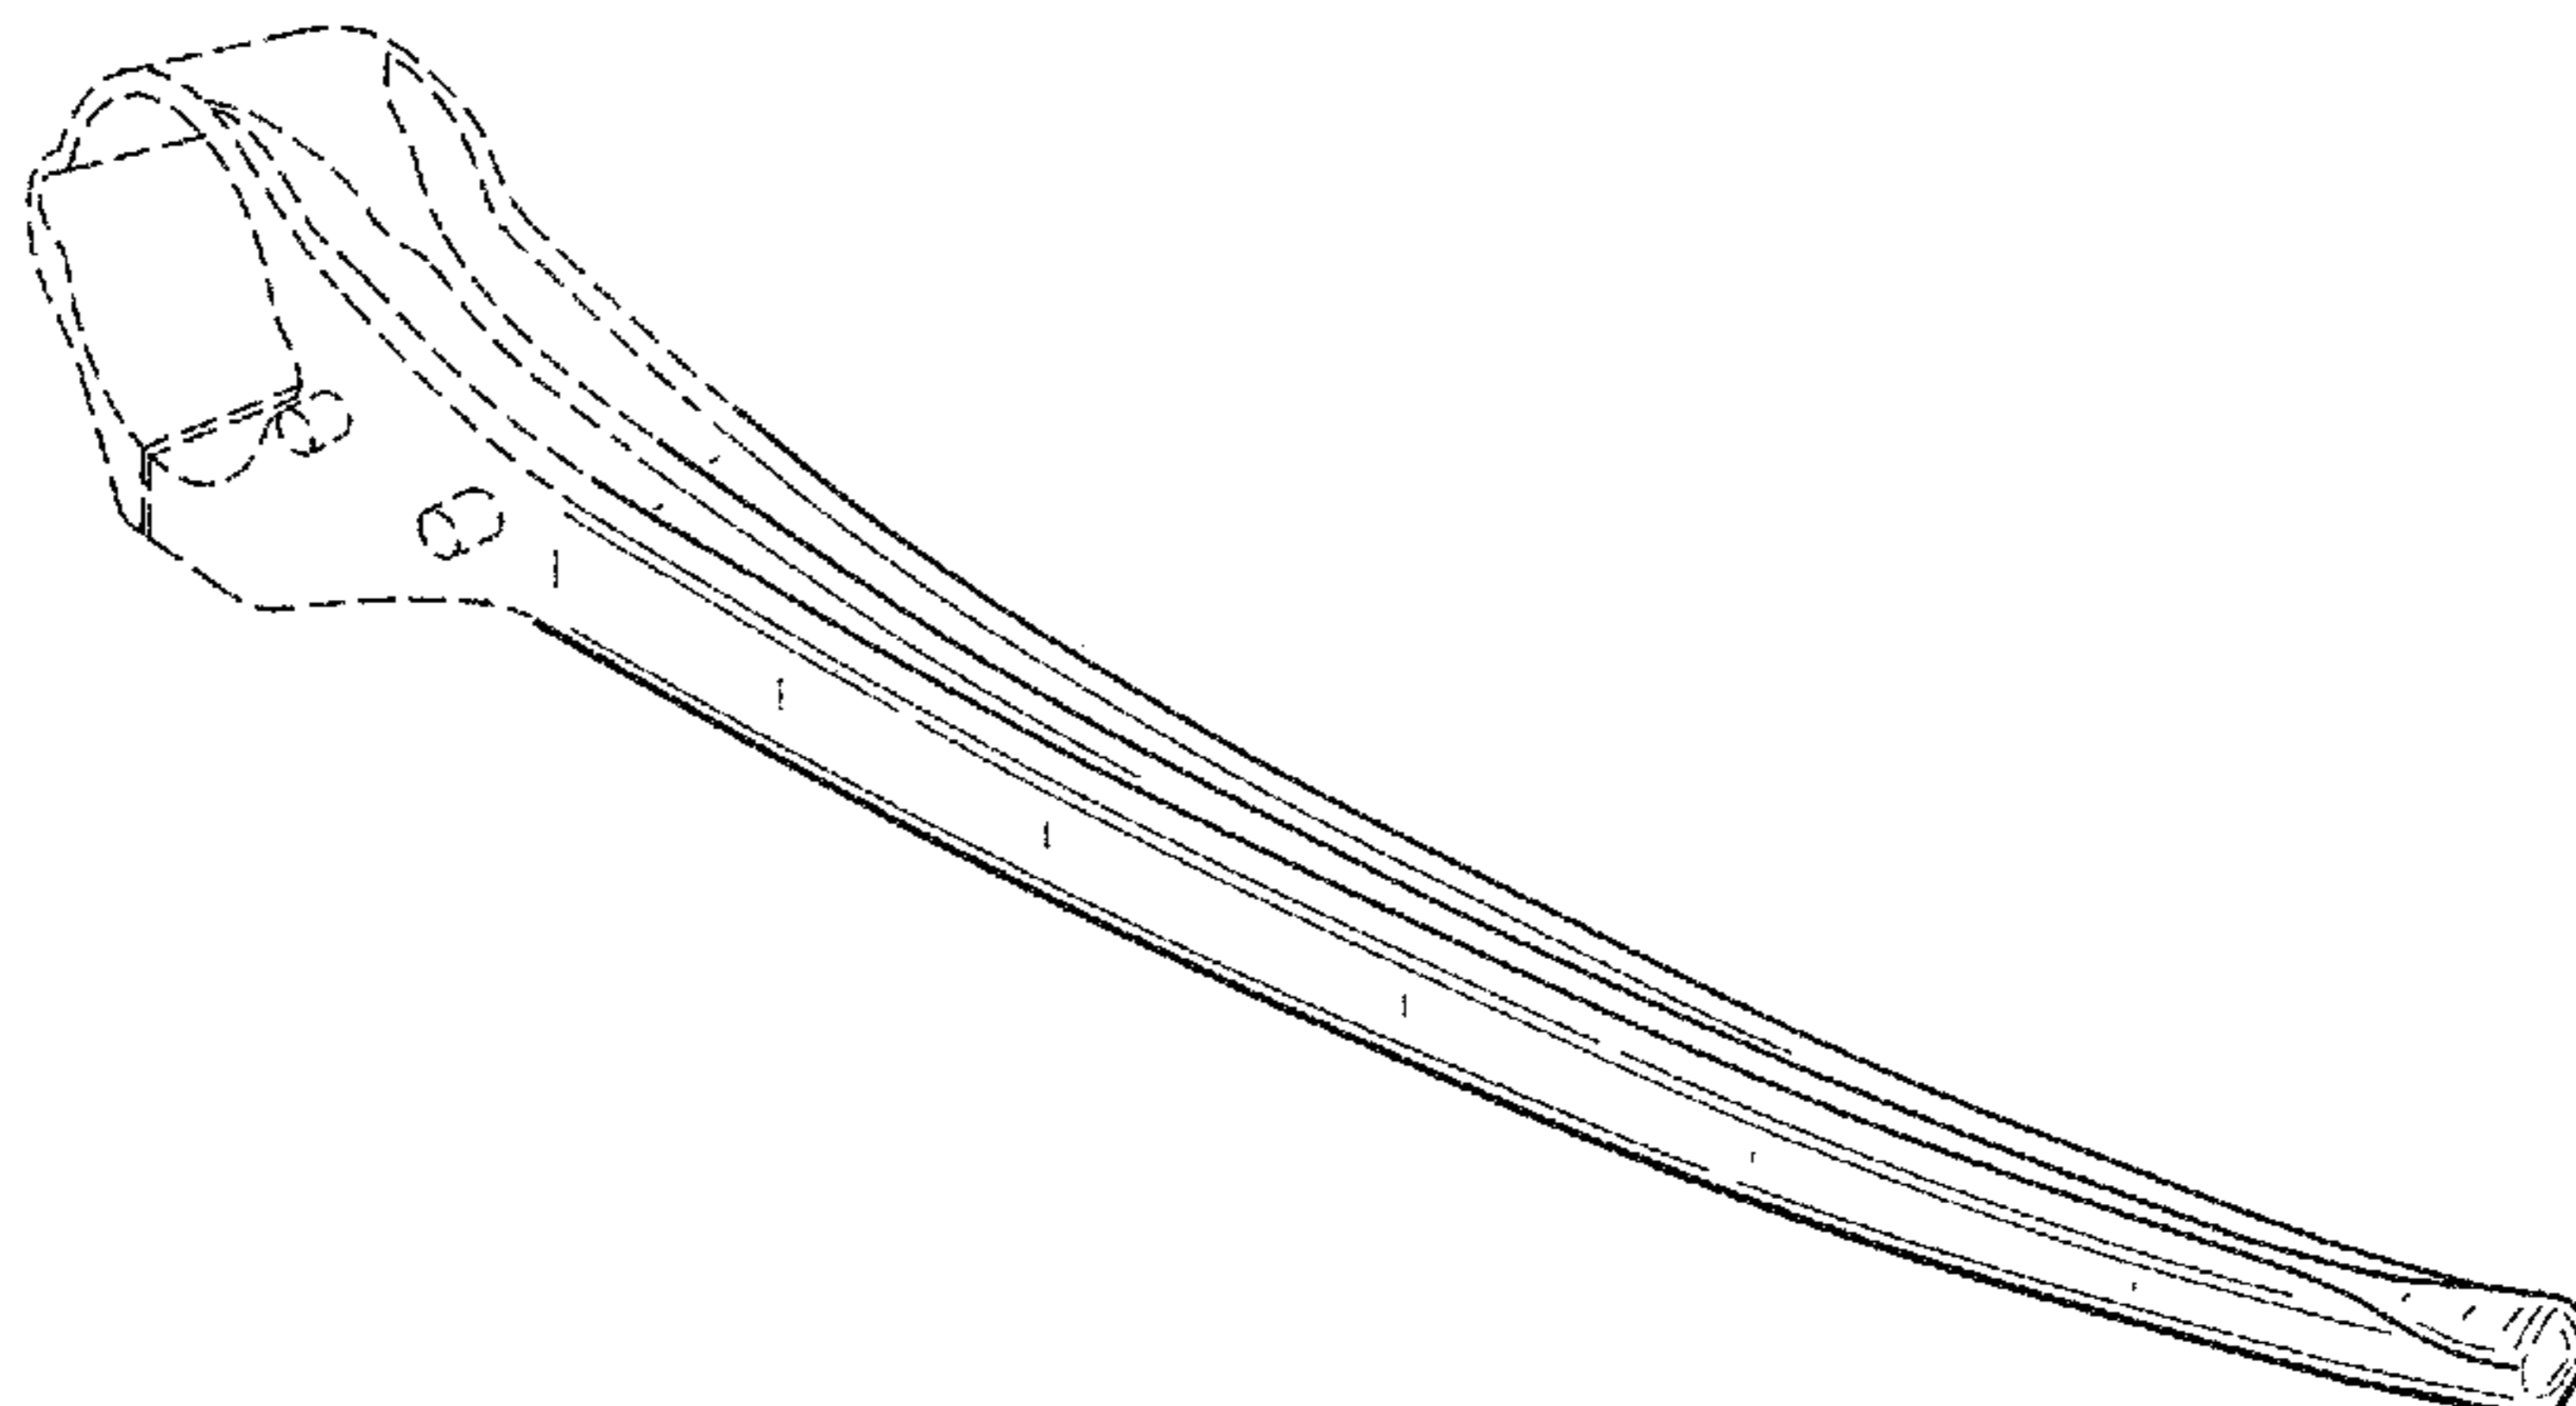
is a back view of the embodiment shown in FIG. 22;
